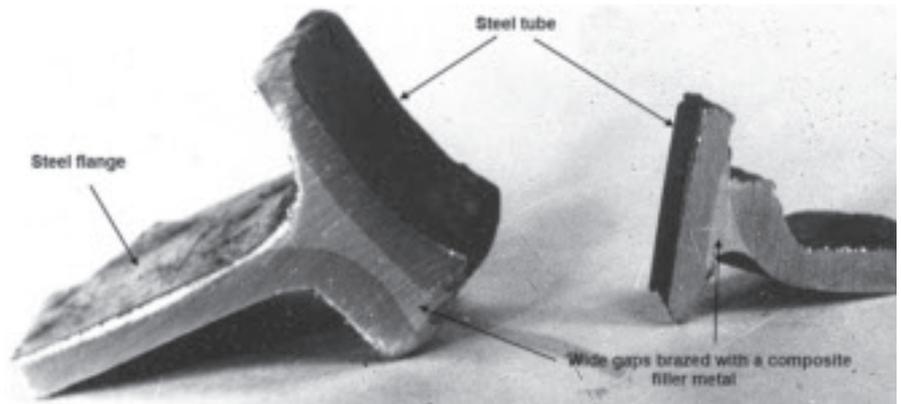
Ultrawide joint clearances of asymmetric geometry brazed with a composite filler metal containing 60% braze alloy and 40% iron powder.
